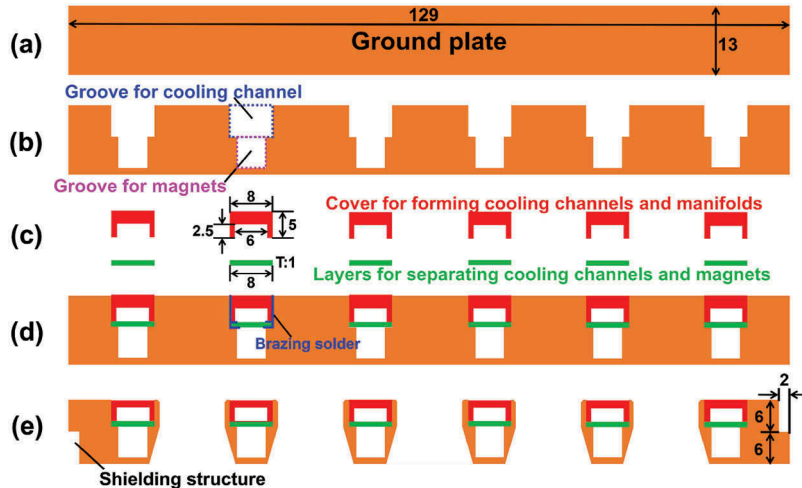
Scheme of the manufacturing process for the prototype EGs.
